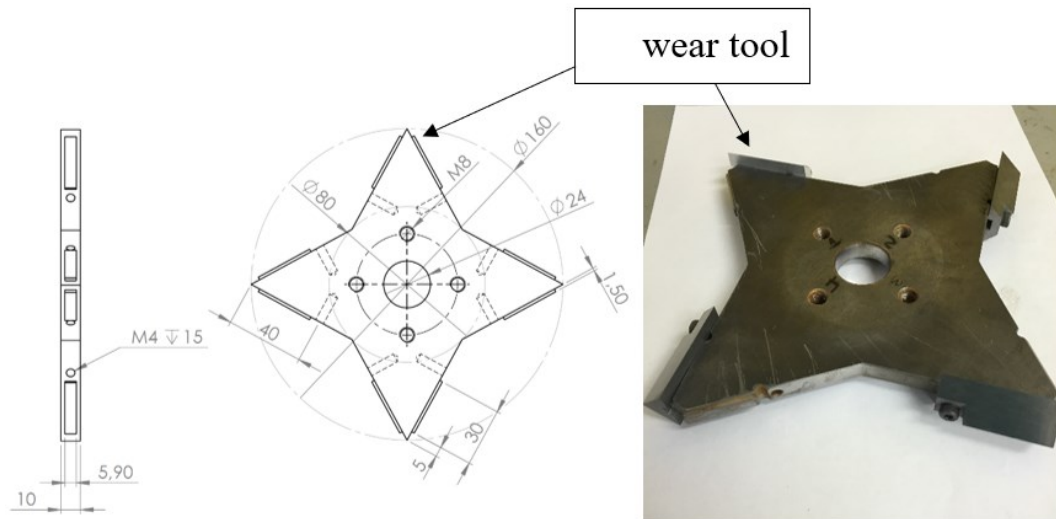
Technical drawing of the wear tool carrier and photo of the arrangement of the wear tools (Oñate Salazar, et al., 2018).
